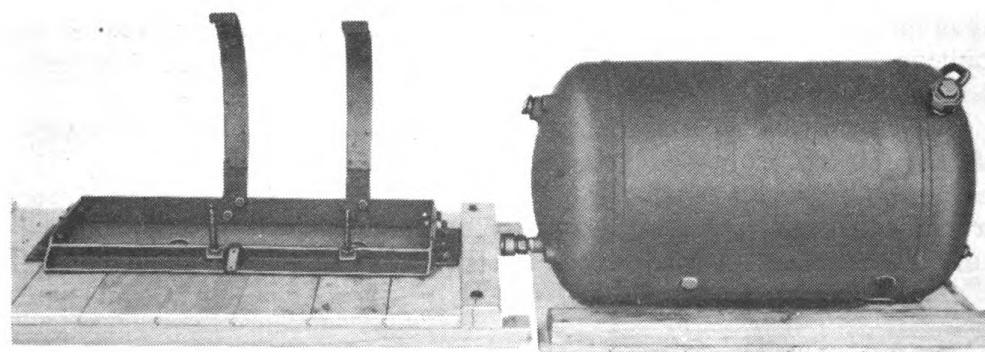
Fuel container removed, showing back fuel container straps on baseplate of sponson fuel group.
